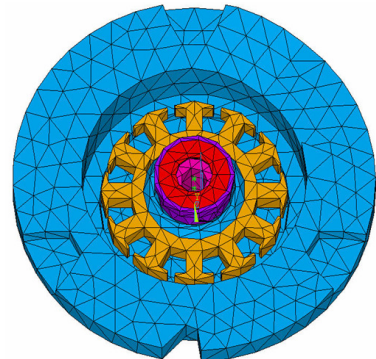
Mechanical structure of a 3.5" HDD disk-spindle system
